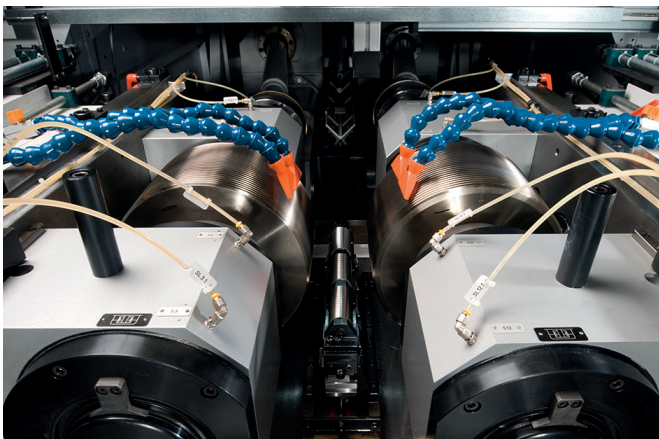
Thread rolling machine 2-PR 100 CNC/AC
